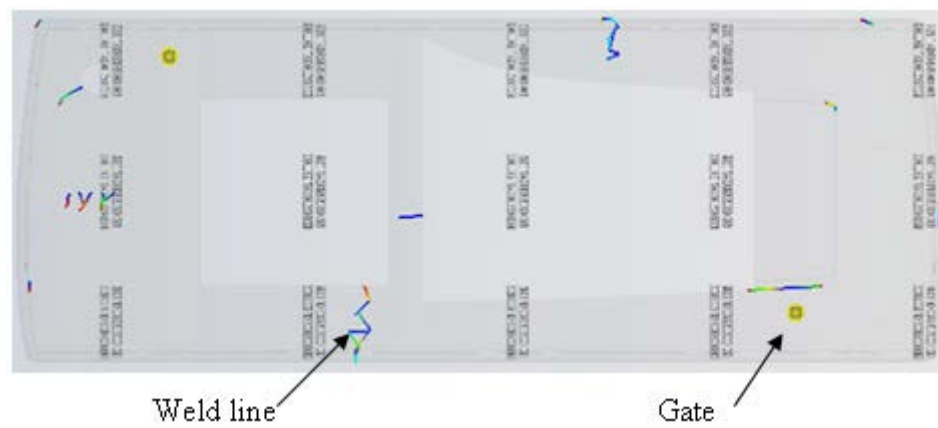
Weld lines produced by two injection gates at location C
